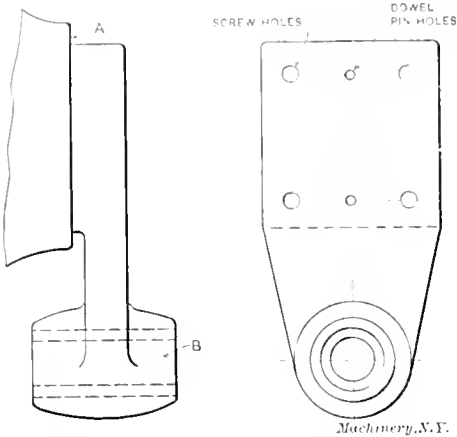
A Case where the Bushing Hole is Bored Previous to locating and fastening Bracket on Jig Body.
